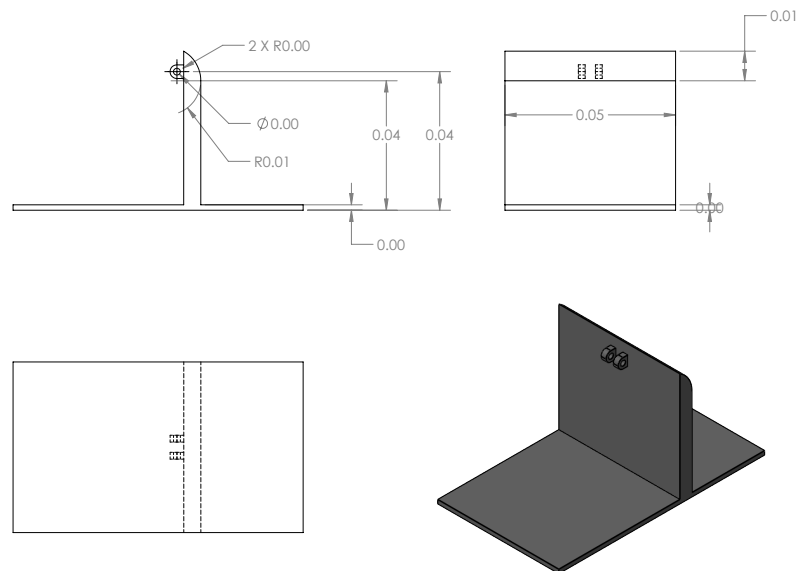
Heel and Toe Foot Components. All dimensions in inches
